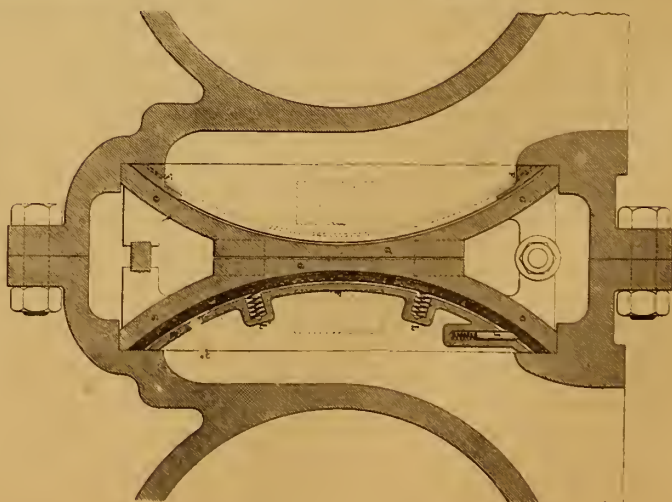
Transverse section of Valve and Valve-Chest of Inside-cylinder engine.
